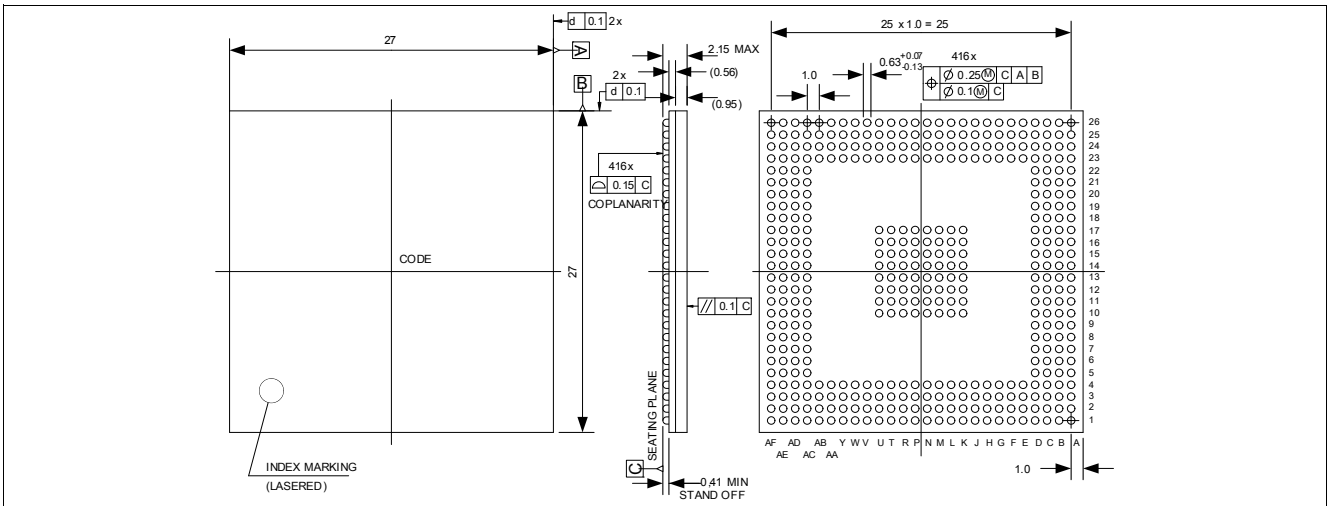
Package Outlines PG-BGA-416-26 / PG-BGA-416-29
